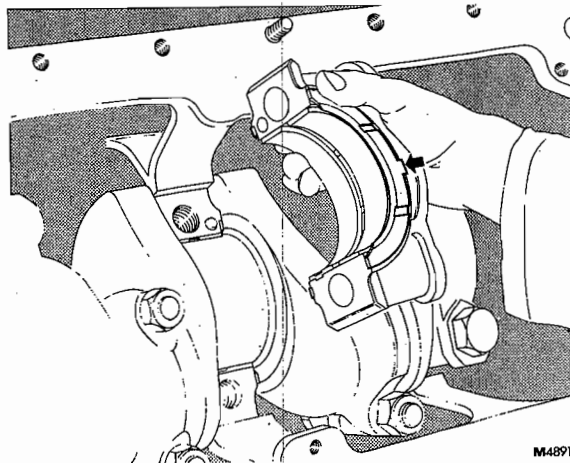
FITTING CENTRE MAIN BEARING CAP SHOWING TONGUE LOCATION OF LOWER THRUST WASHER
